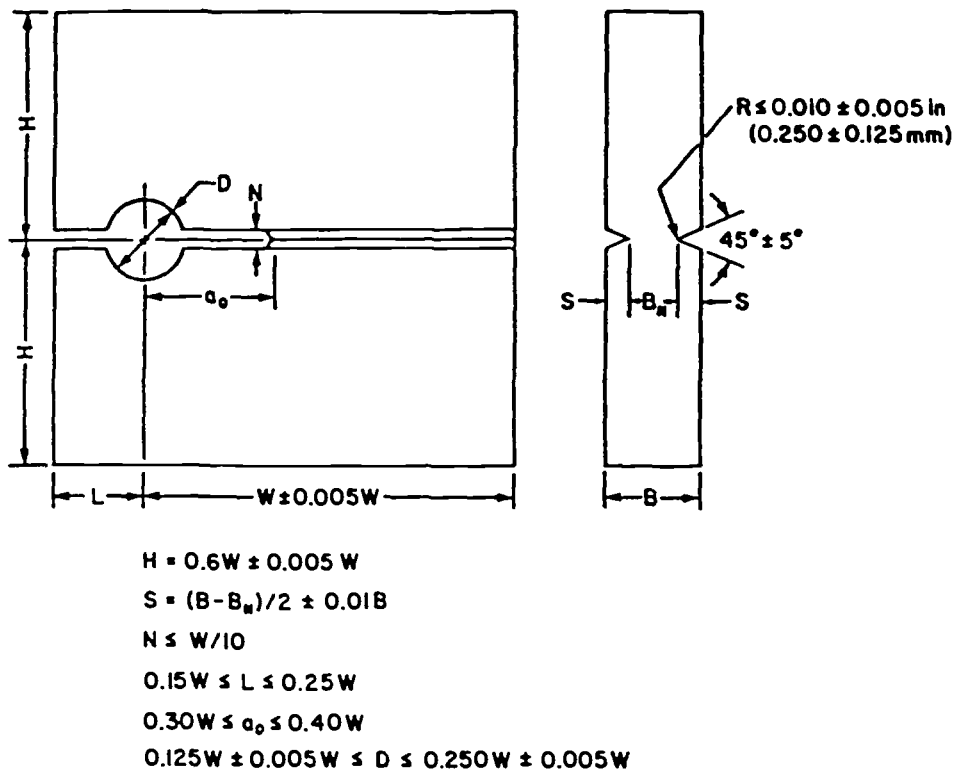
The geometry and dimensions of the crack-line wedge-loaded compact specimen used for crack arrest testing (CCA specimen).
